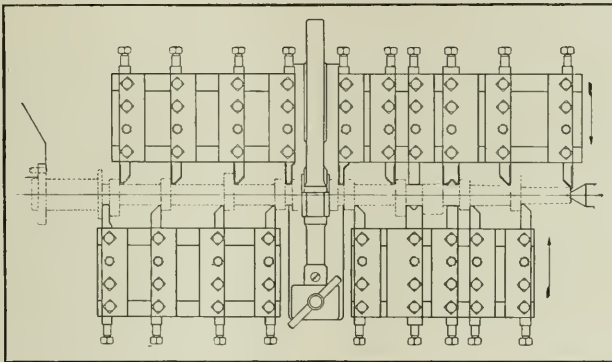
Tooling provided on a Fay Automatic Lathe for squaring the Shoulders of Camshafts
